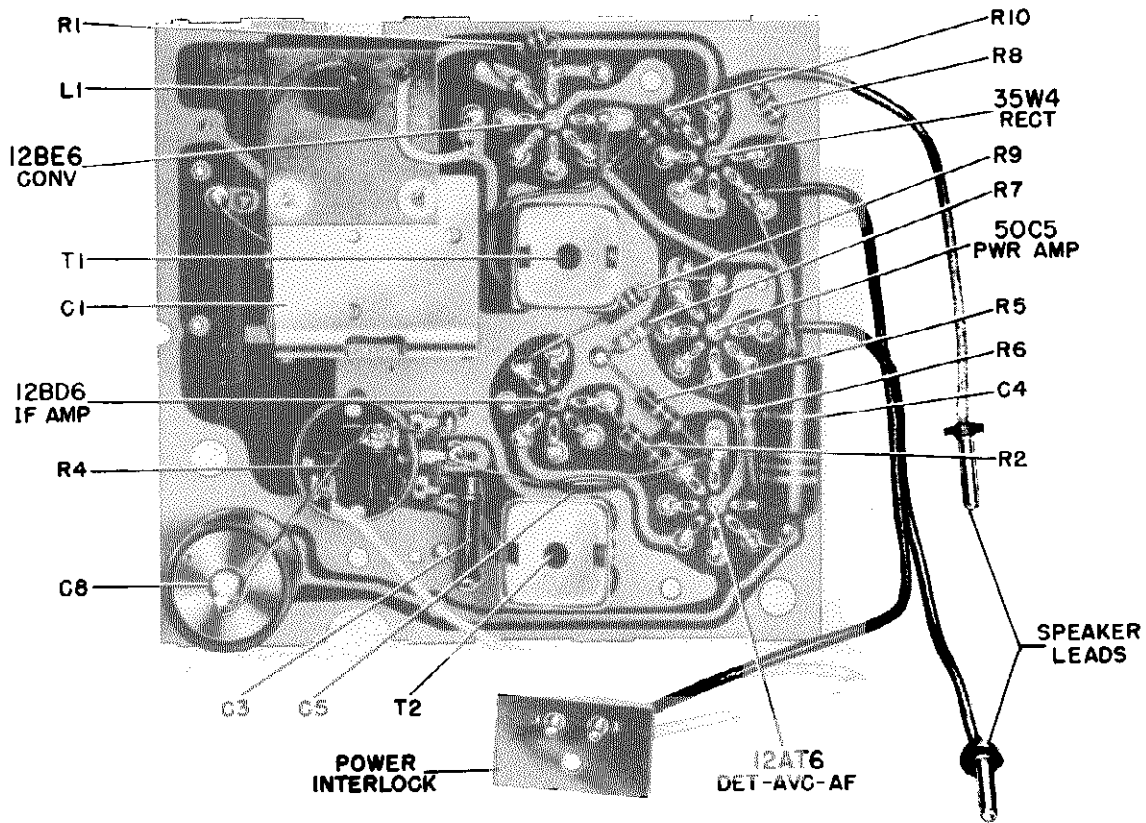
FRONT VIEW OF CHASSIS (EARLY MODEL)
